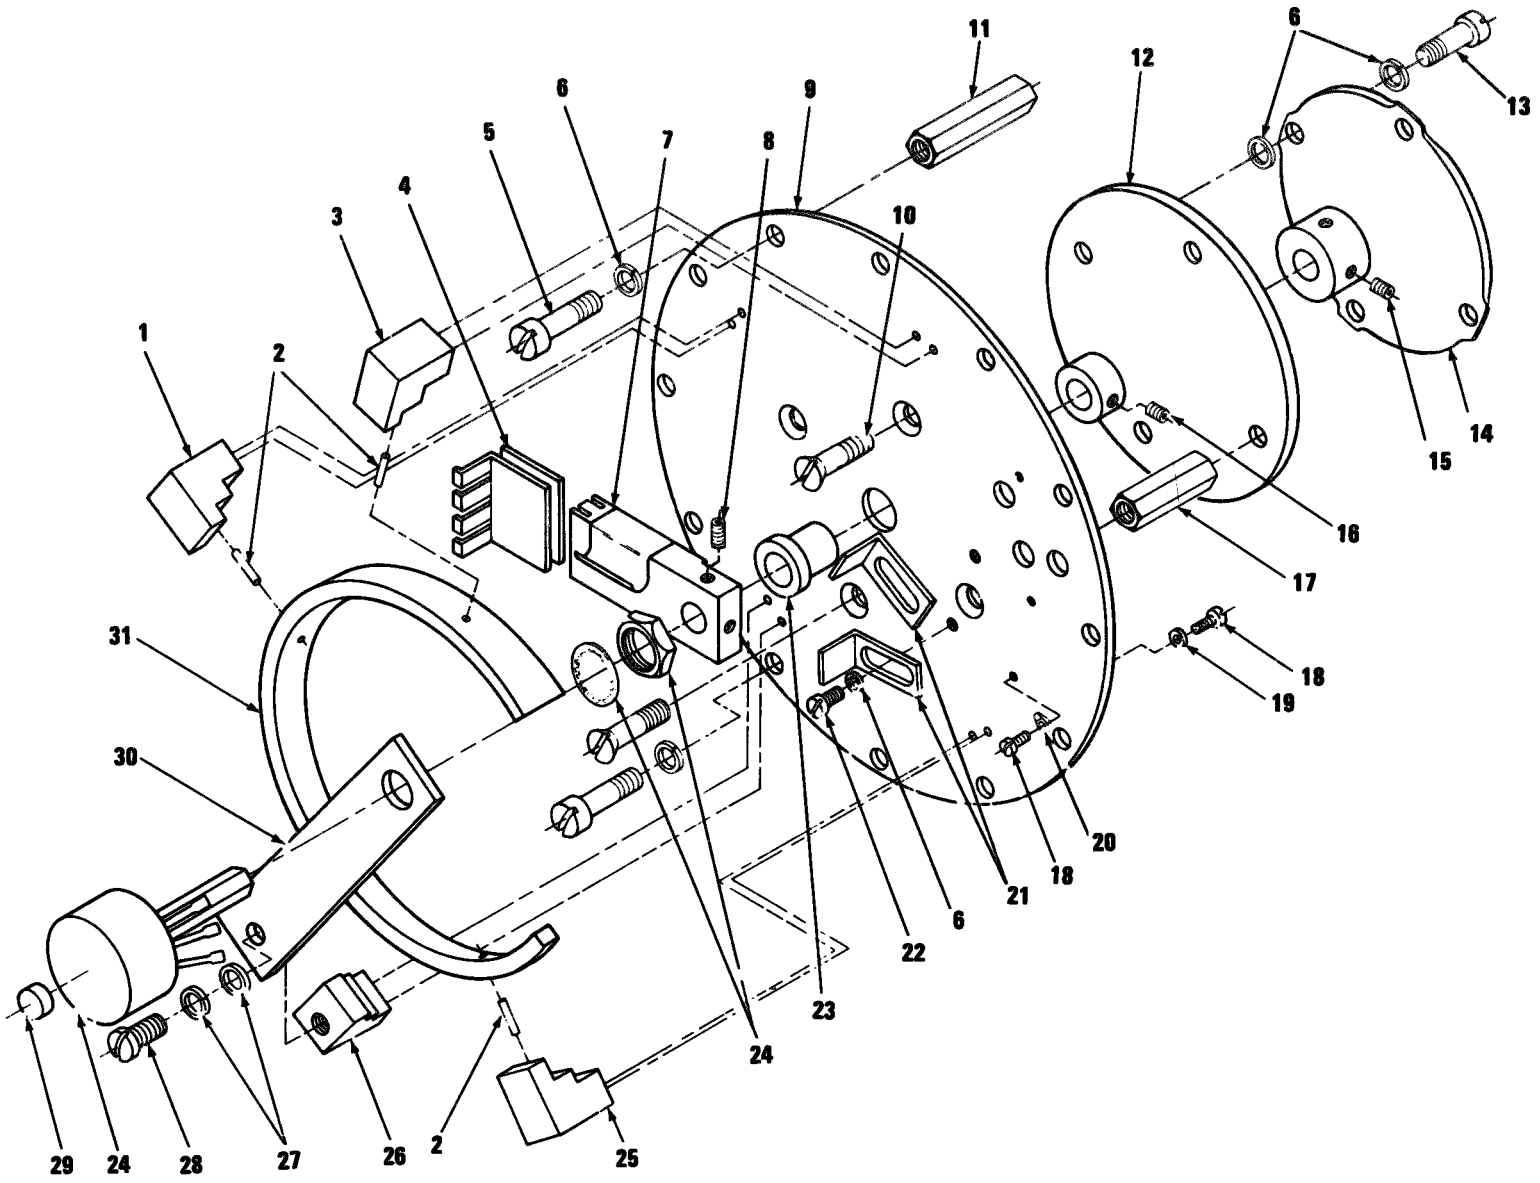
Base Plate Subassembly (Sheet 1 of 2)
